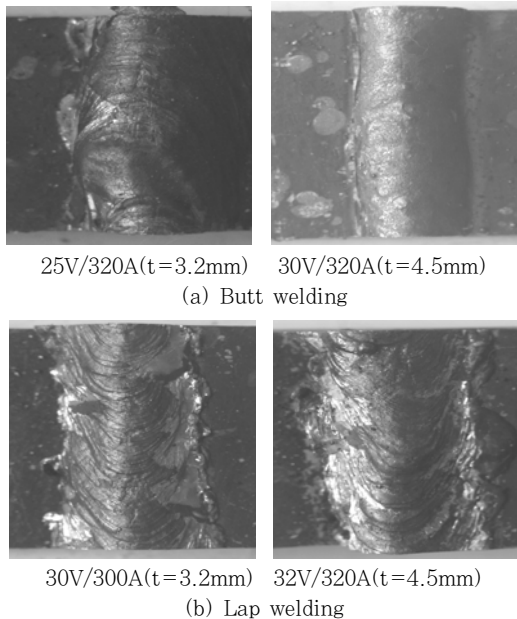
Photographs of welded specimens with various welding conditions
